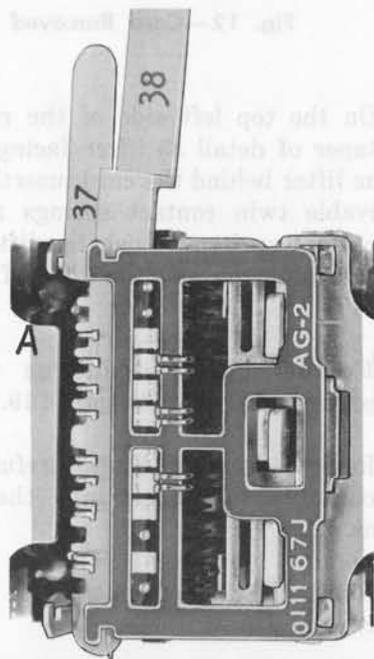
Detail 38 Comb Lifter in Place With Detail 37 Comb
